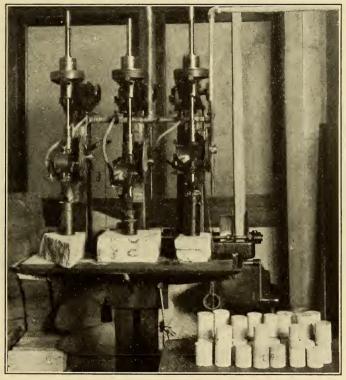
Three spindle core drill for cutting cylindrical specimens
